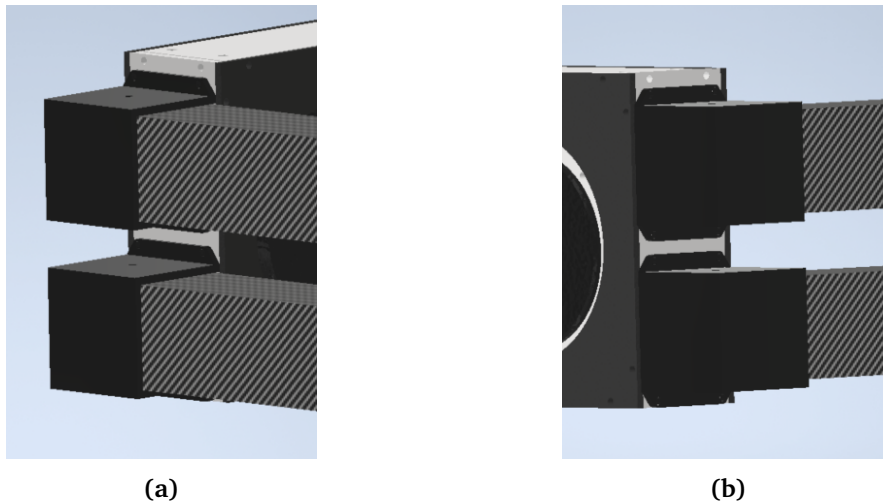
Body Side, tube inserts assembled and fastened to the Motor Housing Body.
